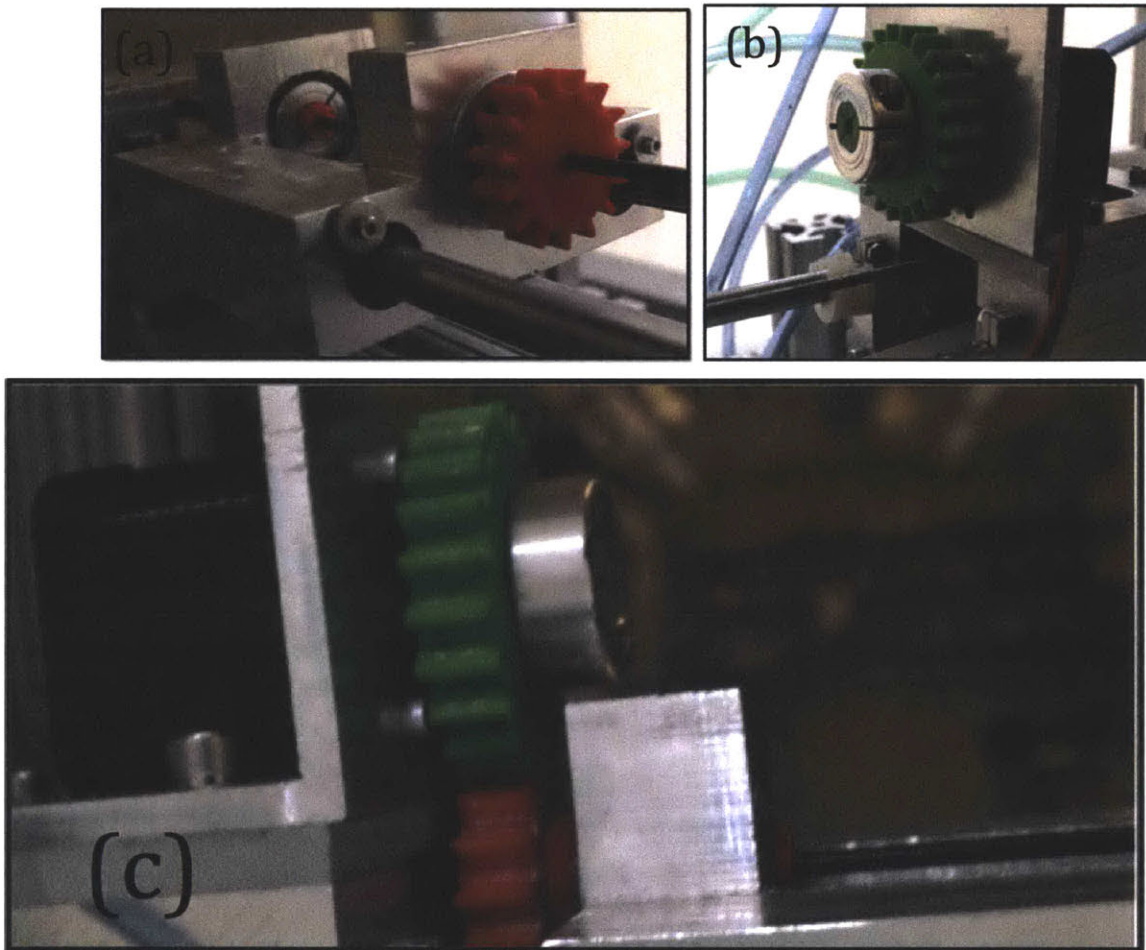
The filleted gears coupling (a) driving gear (b) driven gear (c) driving and driven gear meshed
